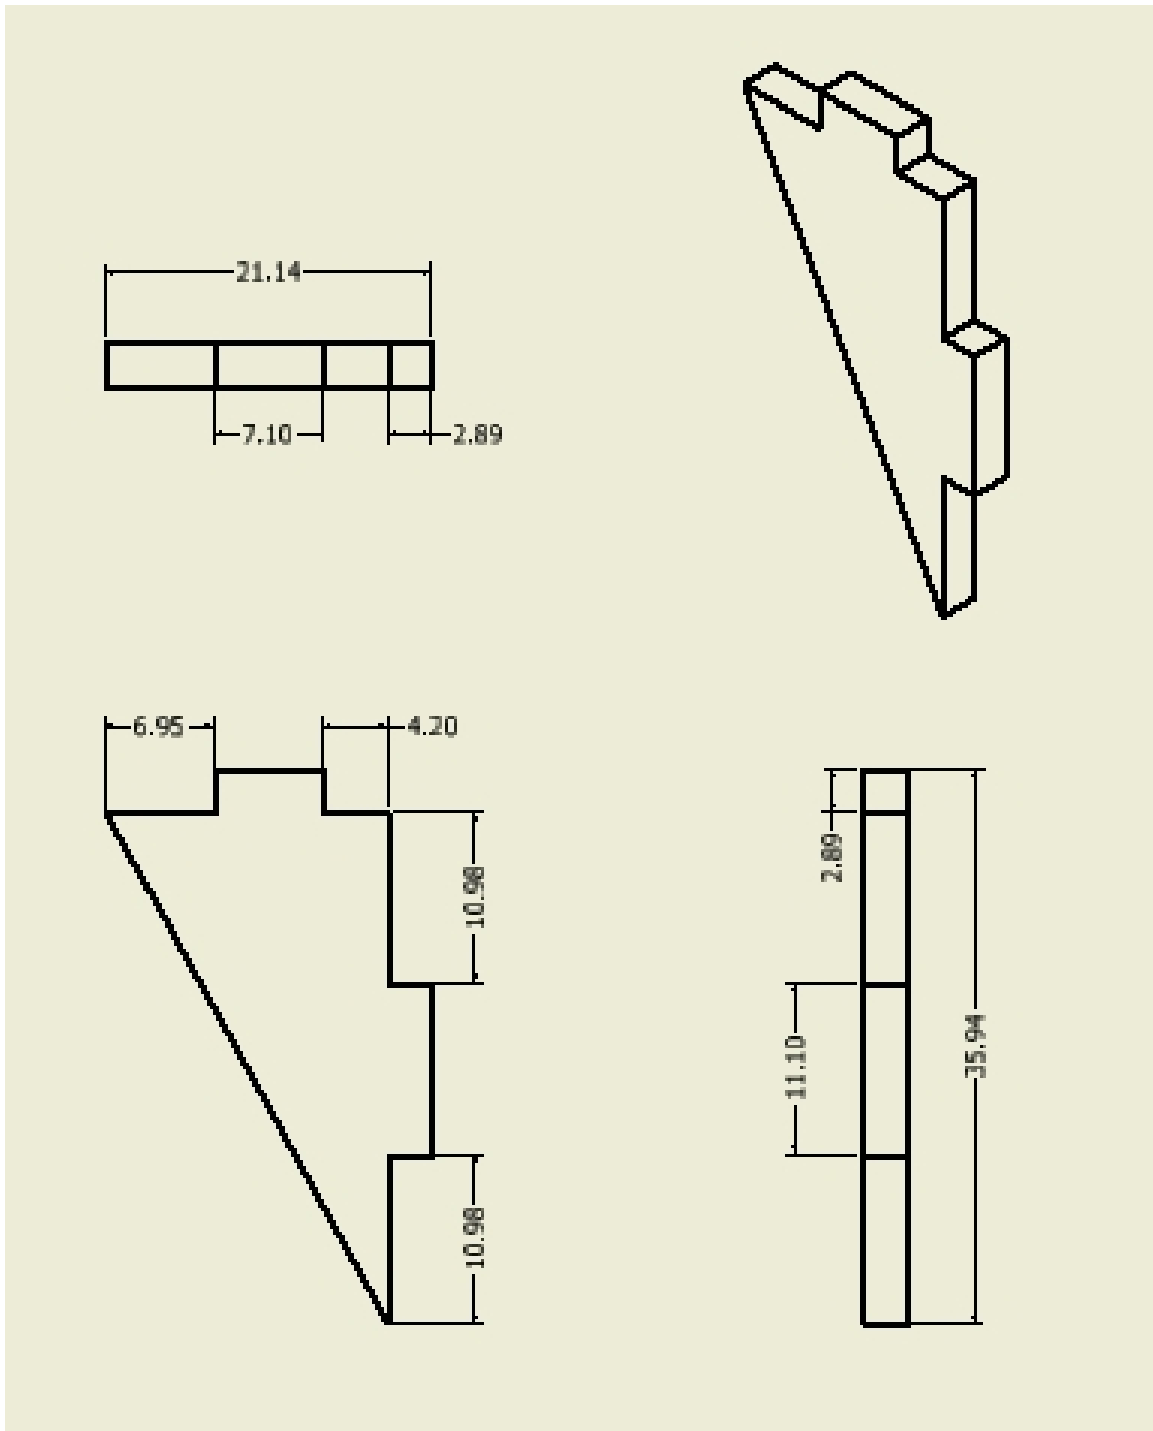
Dual-Axis Accelerometer Plate for Alignment Fixture
